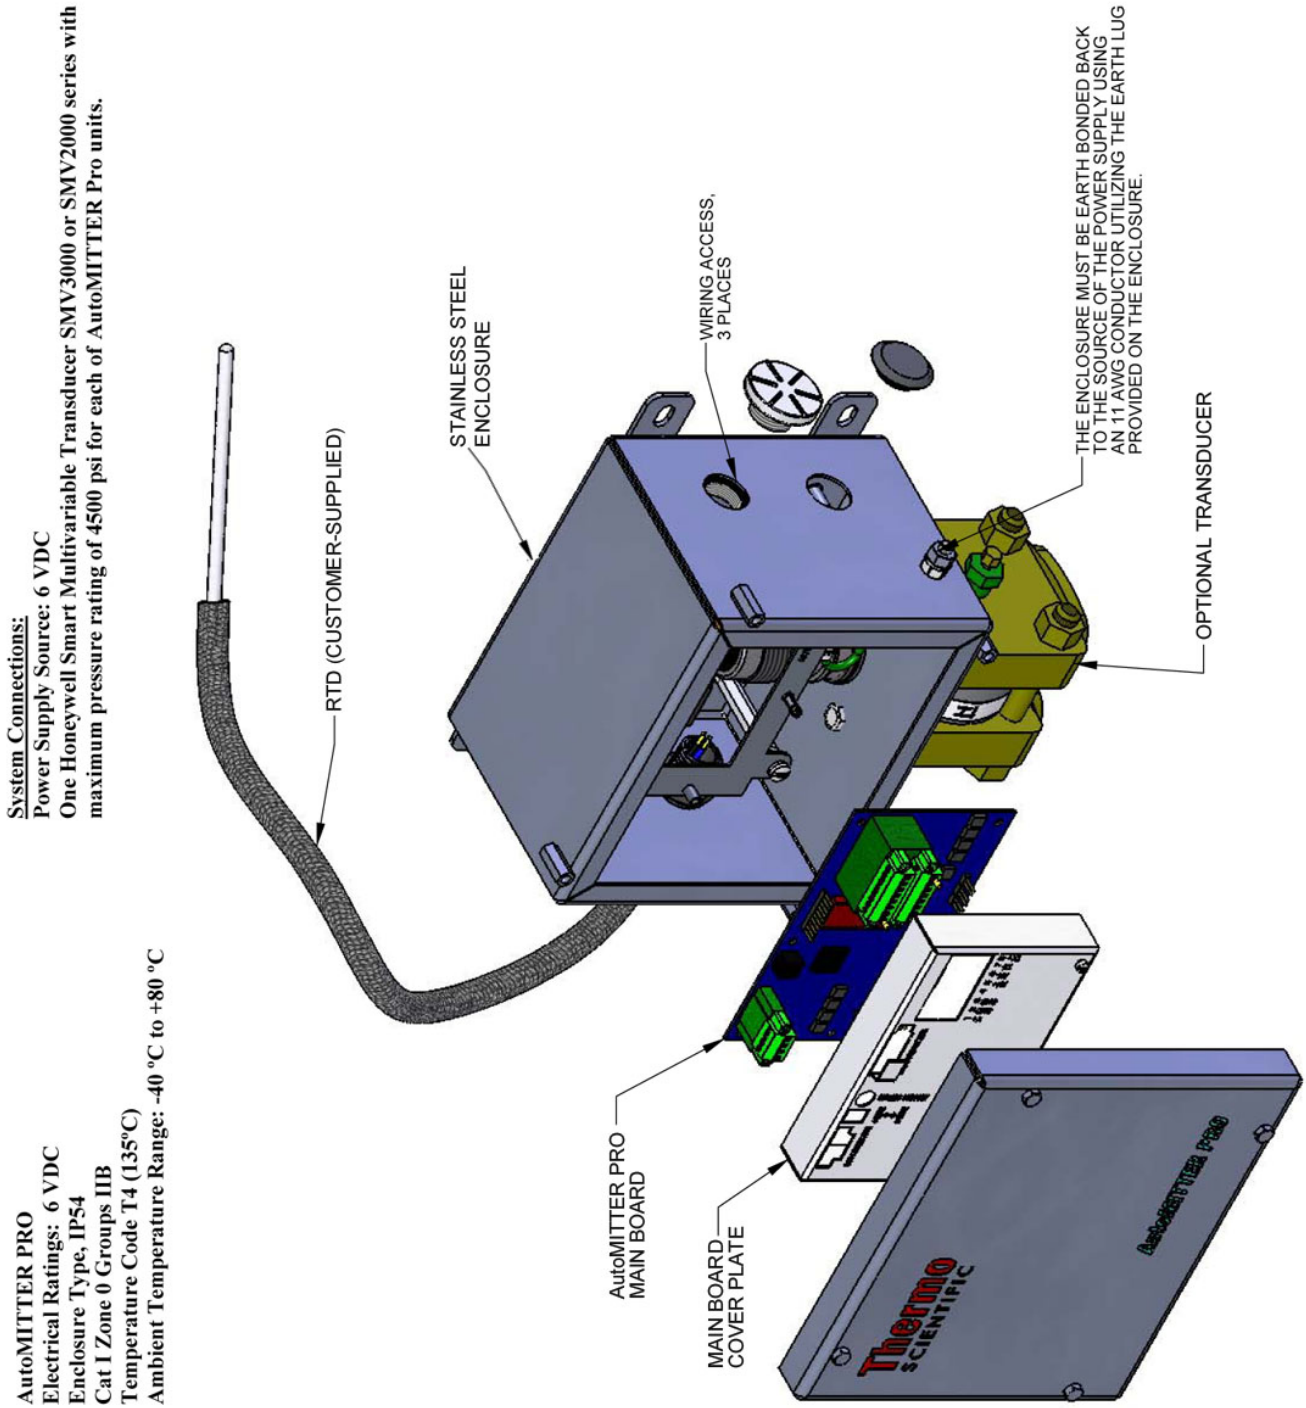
0-0497-516: AutoMITTER PRO general assembly drawing, ATEX (sheet 1 of 3)
